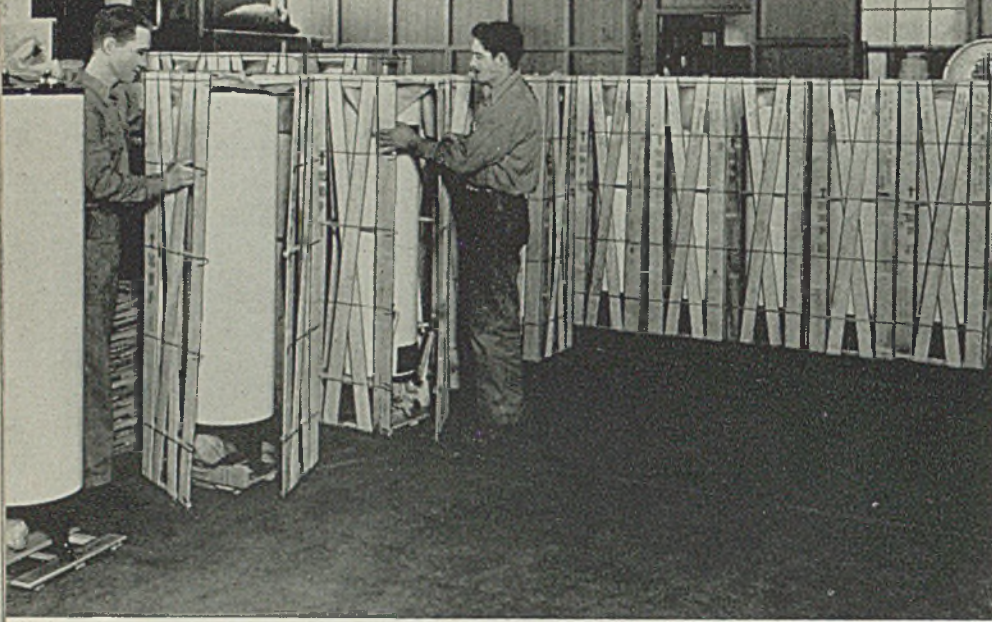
Damage to the highly finished surfaces of his products was a serious problem for this manufacturer of water heaters until he began to employ this special wire-reinforced wrap-around container
